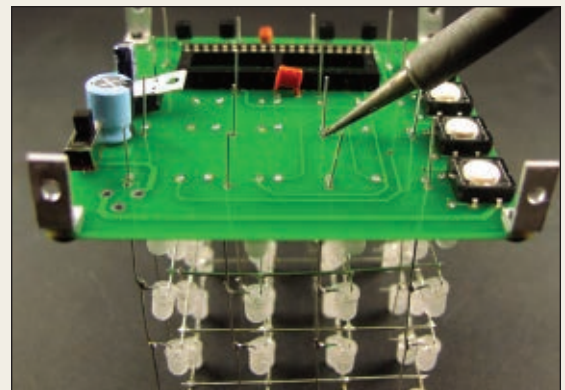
Soldering the LED matrix on the bottom side of the PCB.
